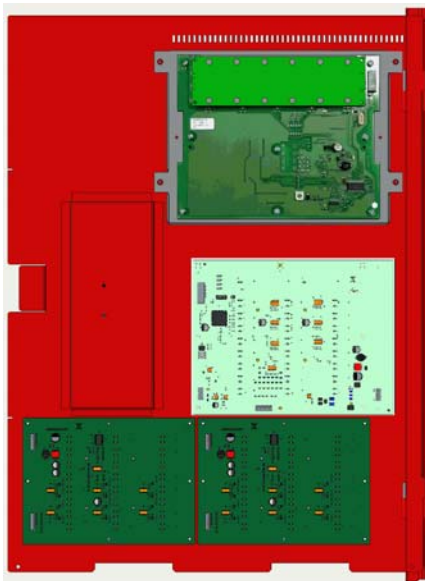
TR-2100ECSR Mounting Location for the TR-SW24
